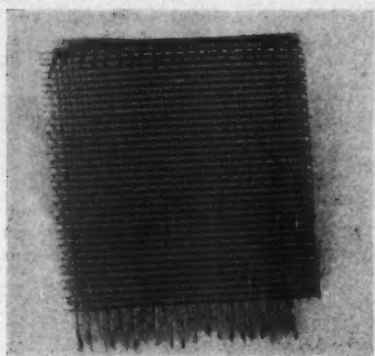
Closeup of completed patch ready to be placed over damaged spot in fourdrinier wire.
